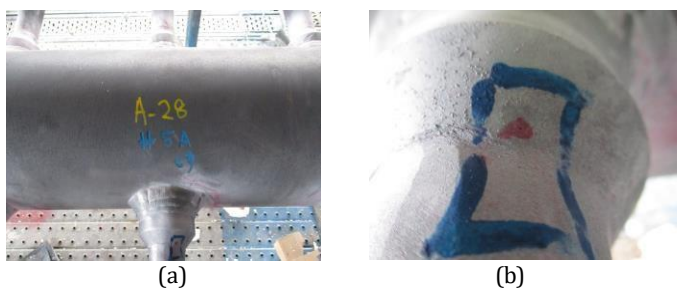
Hot collector weldolet of joint D, (a) general views, (b) showing the rounded dye penetrant finding of 6 mm, facing south and the location at 1 o'clock.
